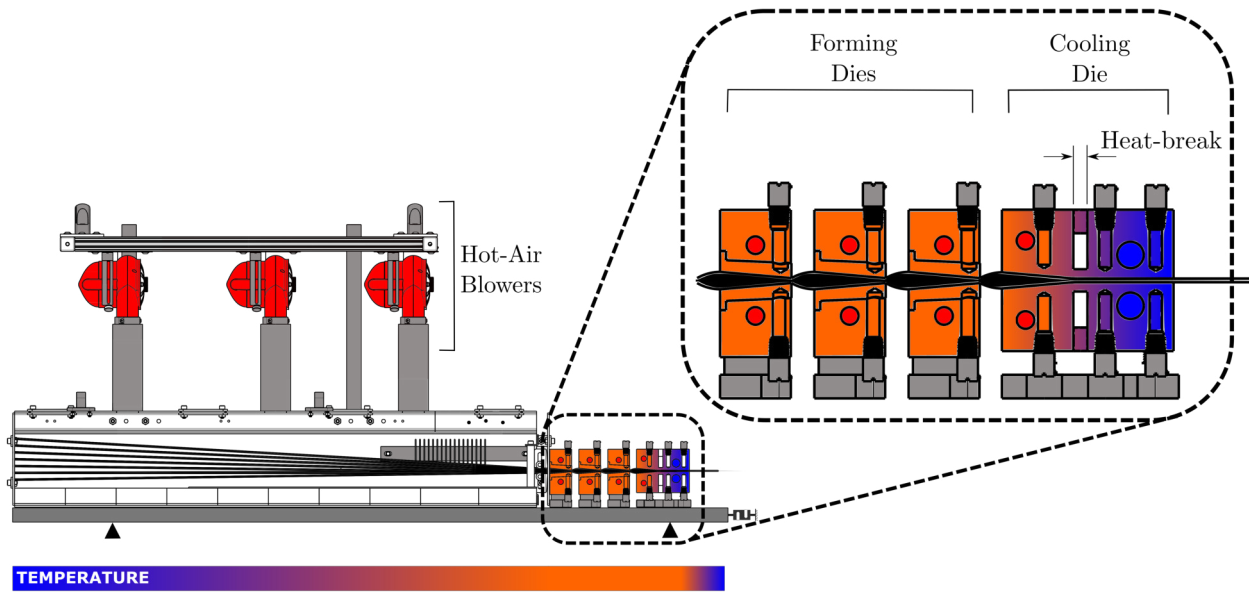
Schematic of the tooling assembly comprised of a preheater, forming dies, and cooling die, in the experimental apparatus
